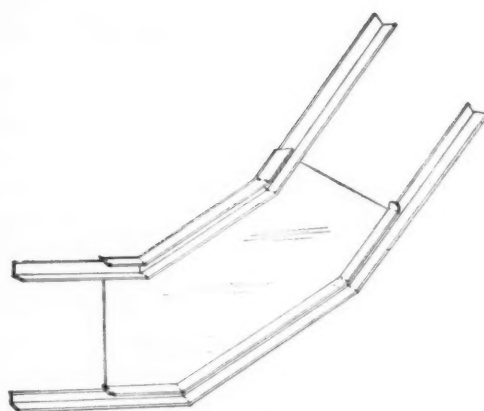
Redesigned "gooseneck" of arc welded parts. Weight 44½ lbs.
